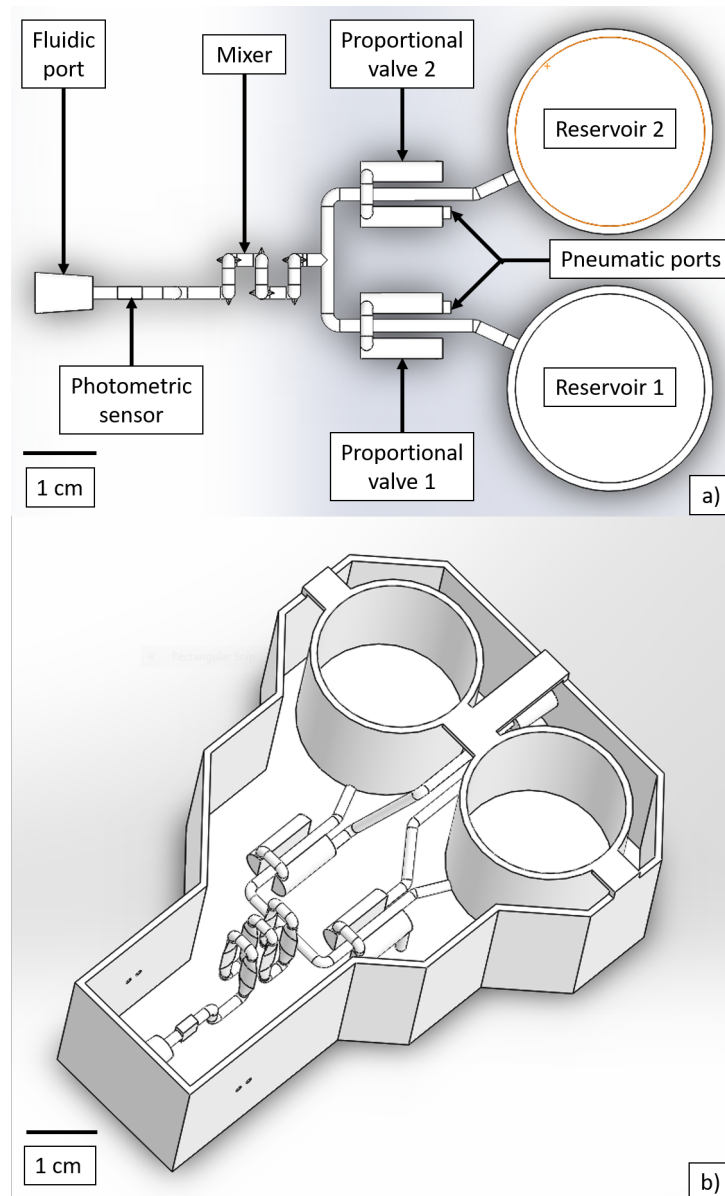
CAD of the negative mould for the final iteration of the device. a) Top view where each functional block are labelled. b) General view of the negative mould. The overall dimensions of the mould are $l = 88$ mm, $w = 65$ mm and $h = 27$ mm
